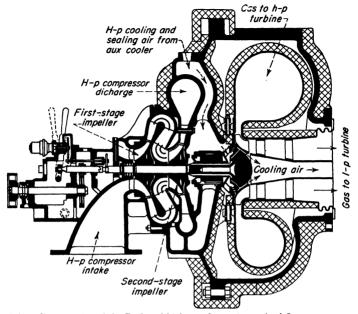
Cross section of the De Laval high-speed two-stage mixed-flow compressor and Birman-wheel turbine for operation at 1500 F. Cooling air flowing through the hub of the turbine wheel supports combustion in the reheating furnace following the turbine.
